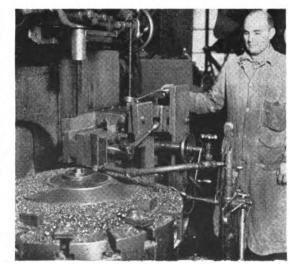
Machining an 8 deg. 3 min. taper on the bottom of an extractor basket for a laundry machine.
